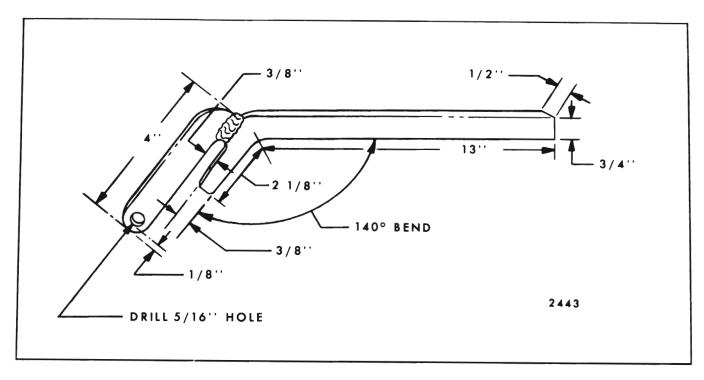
Tool J-22291 "E" Body Torque Rod Adjusting Tool
